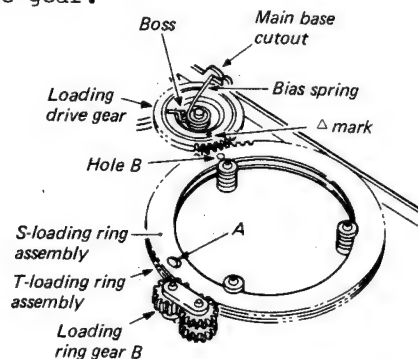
Loading ring assembly/ loading drive gear
